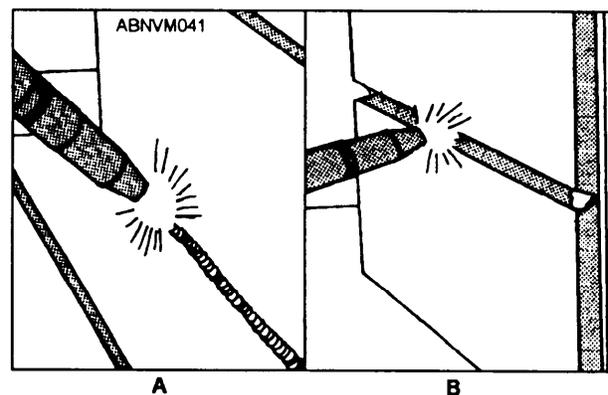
Welding a fillet and butt joint in the horizontal position.
